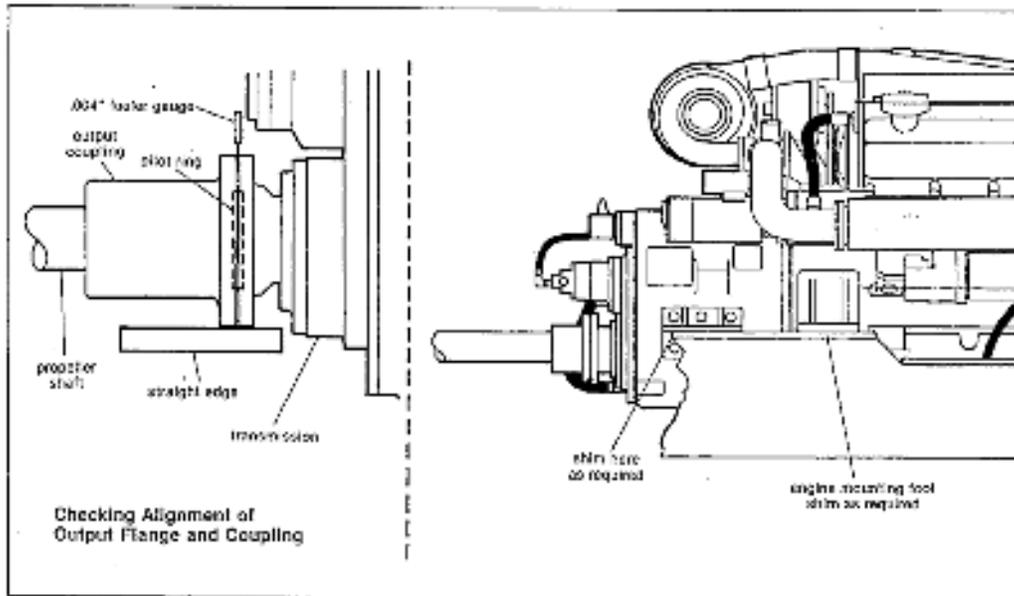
Alignment of Transmission and Engine to Prop Shaft Coupling.
